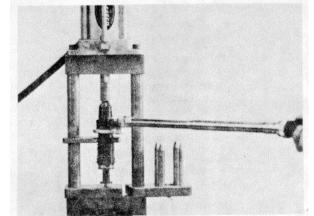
H-17. Torquing the Cup Retainer -Injector ST-1298
